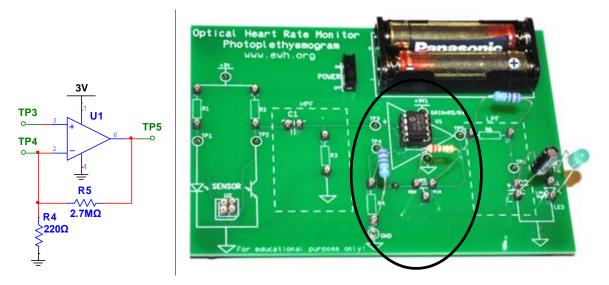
Non-inverter amplifier configuration schematic and PCB assembly.
